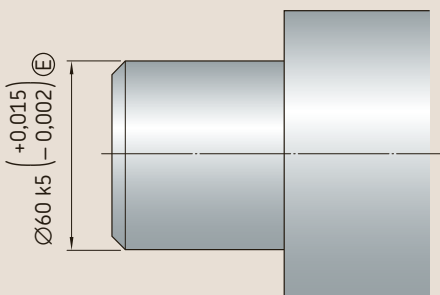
Shaft tolerancing: Shaft end with dimension and tolerance for the shaft diameter.
